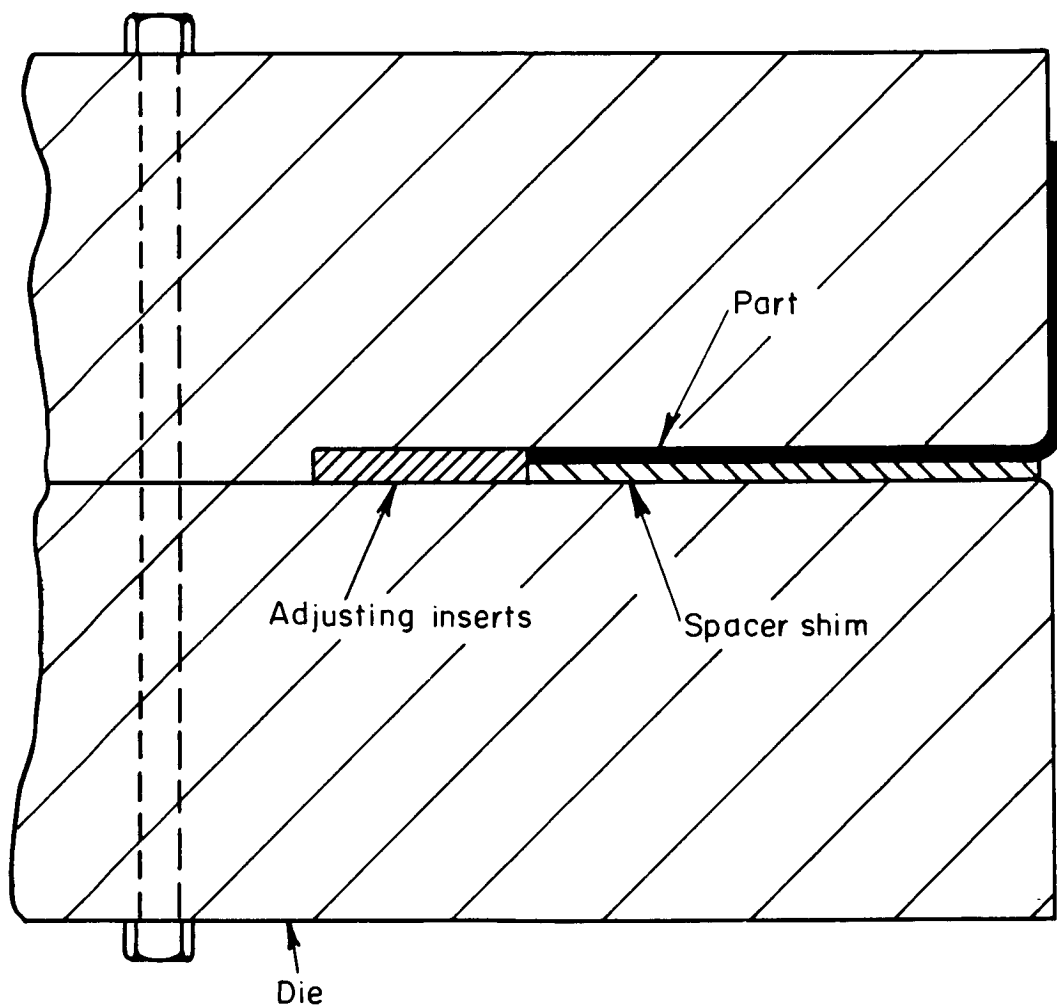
SECTIONAL VIEW OF LINEAR STRETCH TOOLING FOR HEEL-OUT ANGLES (REF. 52)
